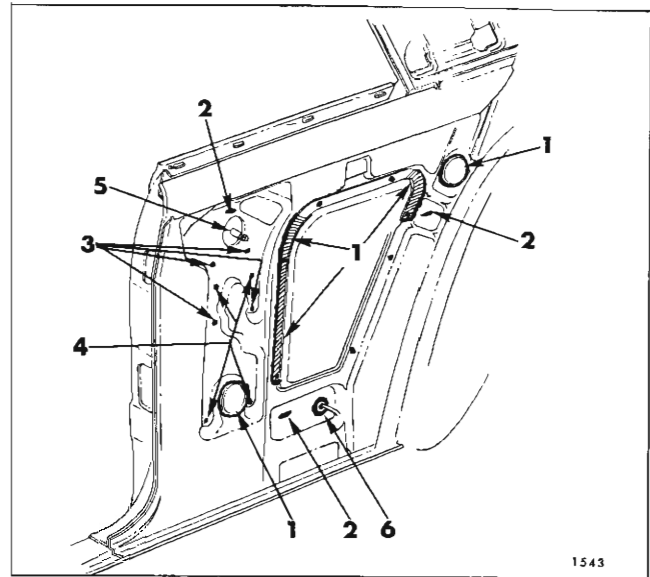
E11—Rear Quarter Inner Panel Sealing - "27" Styles
